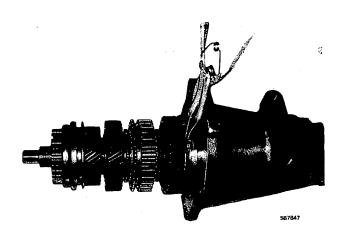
B-47 - Removing Extension from Mainshaft Rear Bearing
